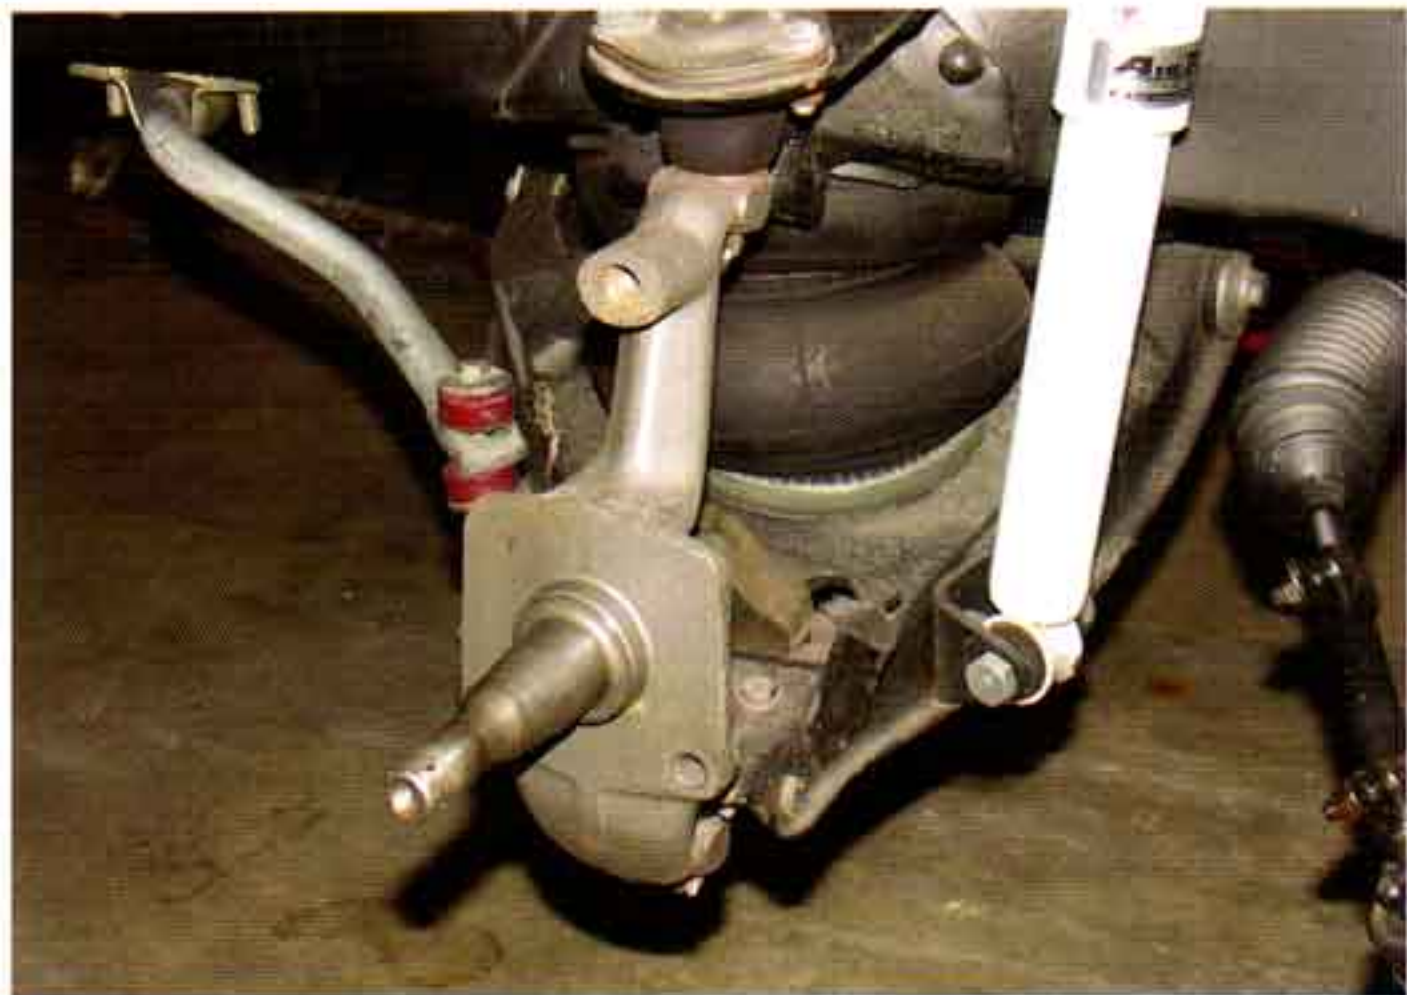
The stock spindle has a large bolt at the top of the spindle where the wheel cylinder is attached and two smaller bolts at the bottom where the backing plate and steering arm bolts up.
